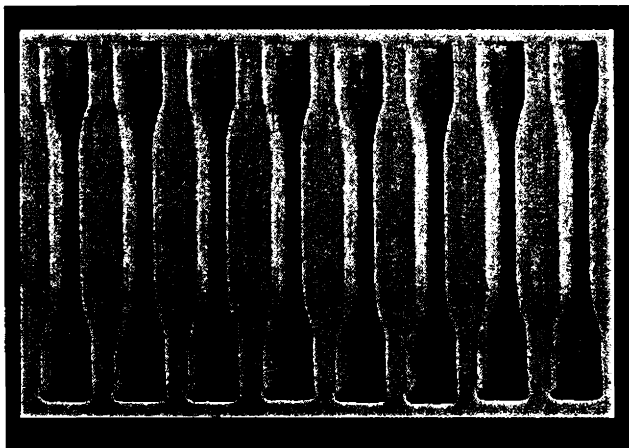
Photograph of Teflon mould for tensile specimen
